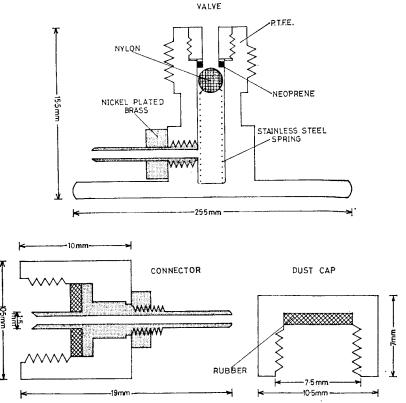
Blood pressure valve device; cross-sectional diagram illustrating valve, connector and dust-cap.
